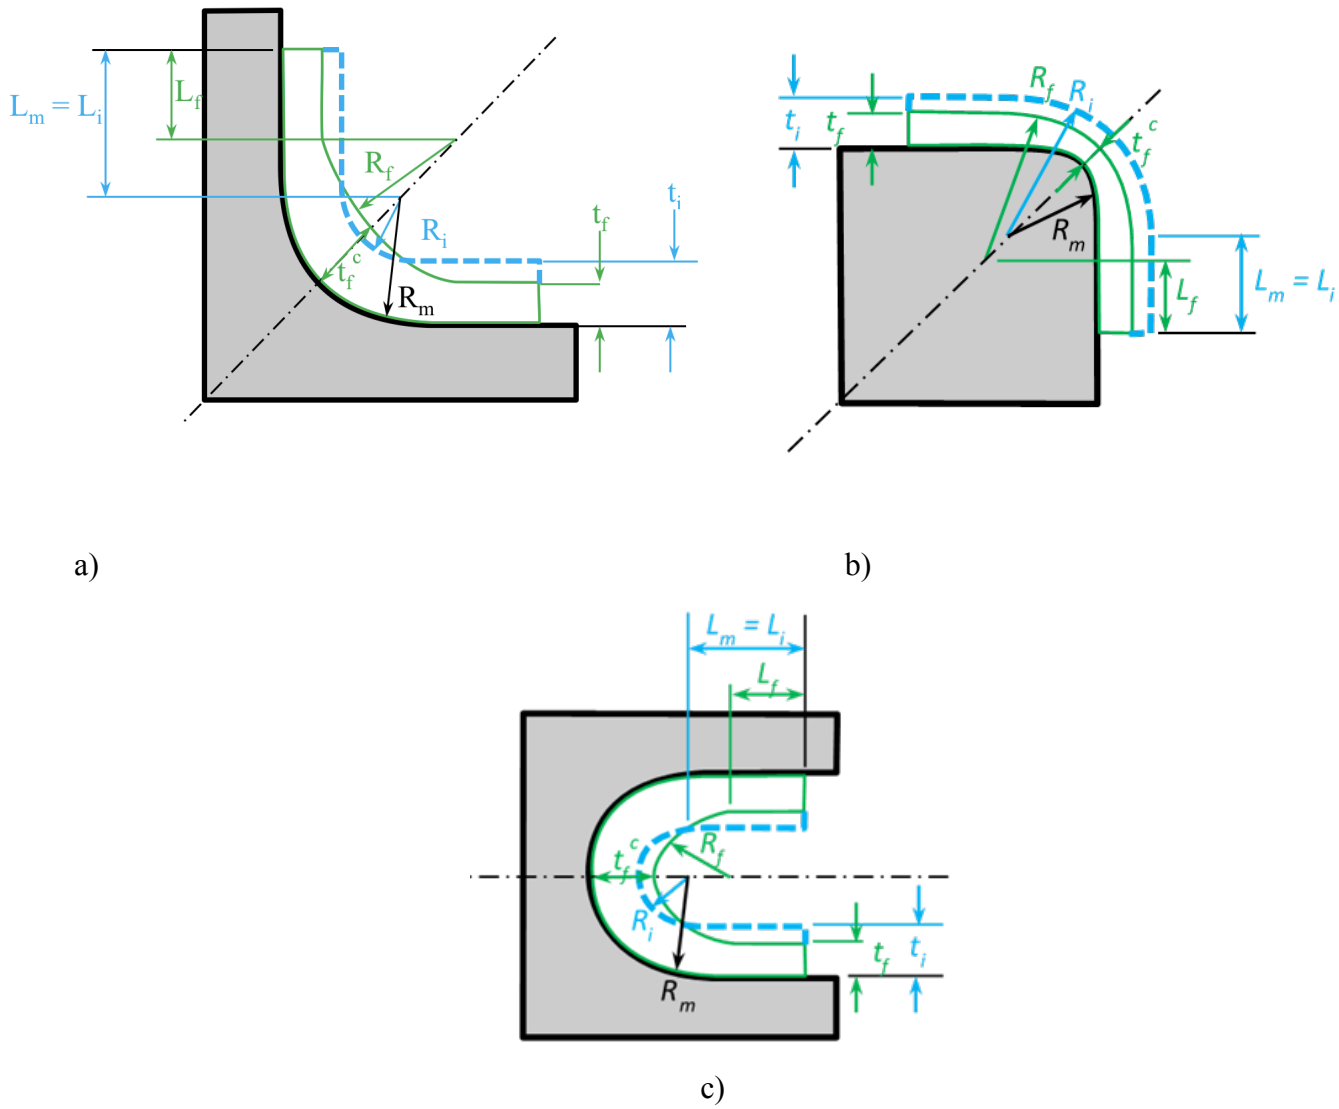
Initial and final curved laminate configuration: a) L-shape female mould, b) L-shape male mould, c) U-shape female mould.
